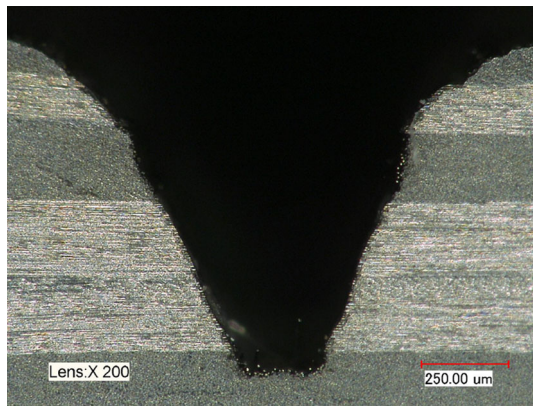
Cross-sectional view of the machined sample for optimum solution
